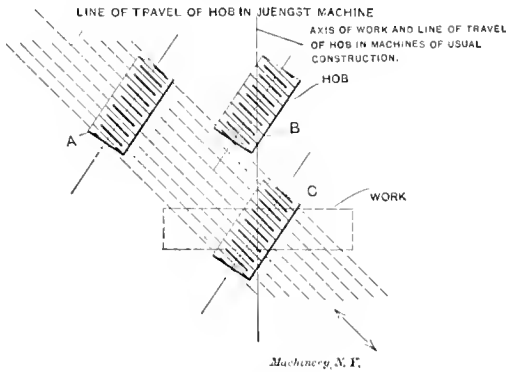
Method of Feeding the Hob in the Juengst Machine
